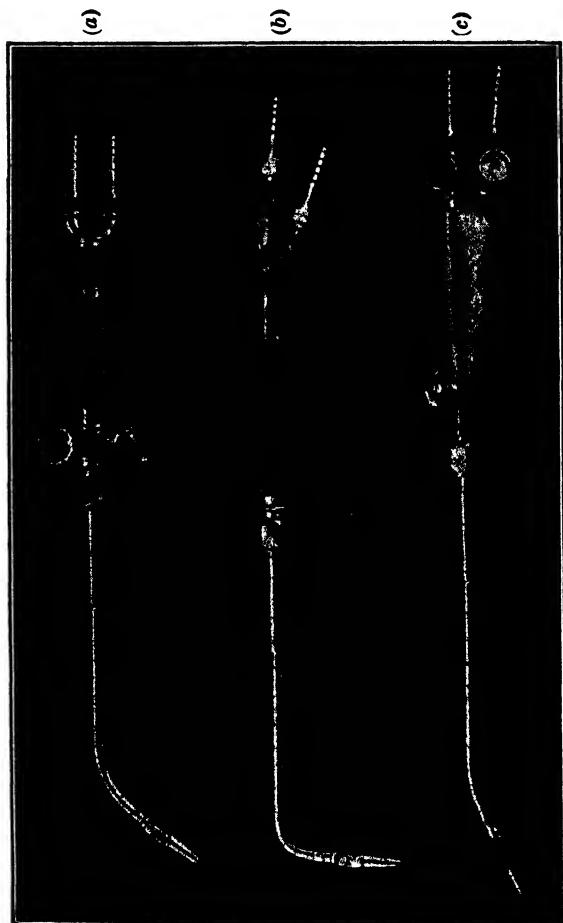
(a) Pipe for leftward welding—nozzle set at 135° . (b) Pipe for rightward welding—nozzle set at 90° . (c) Pipe for low temperature welding—cast iron and non-ferrous metals.
